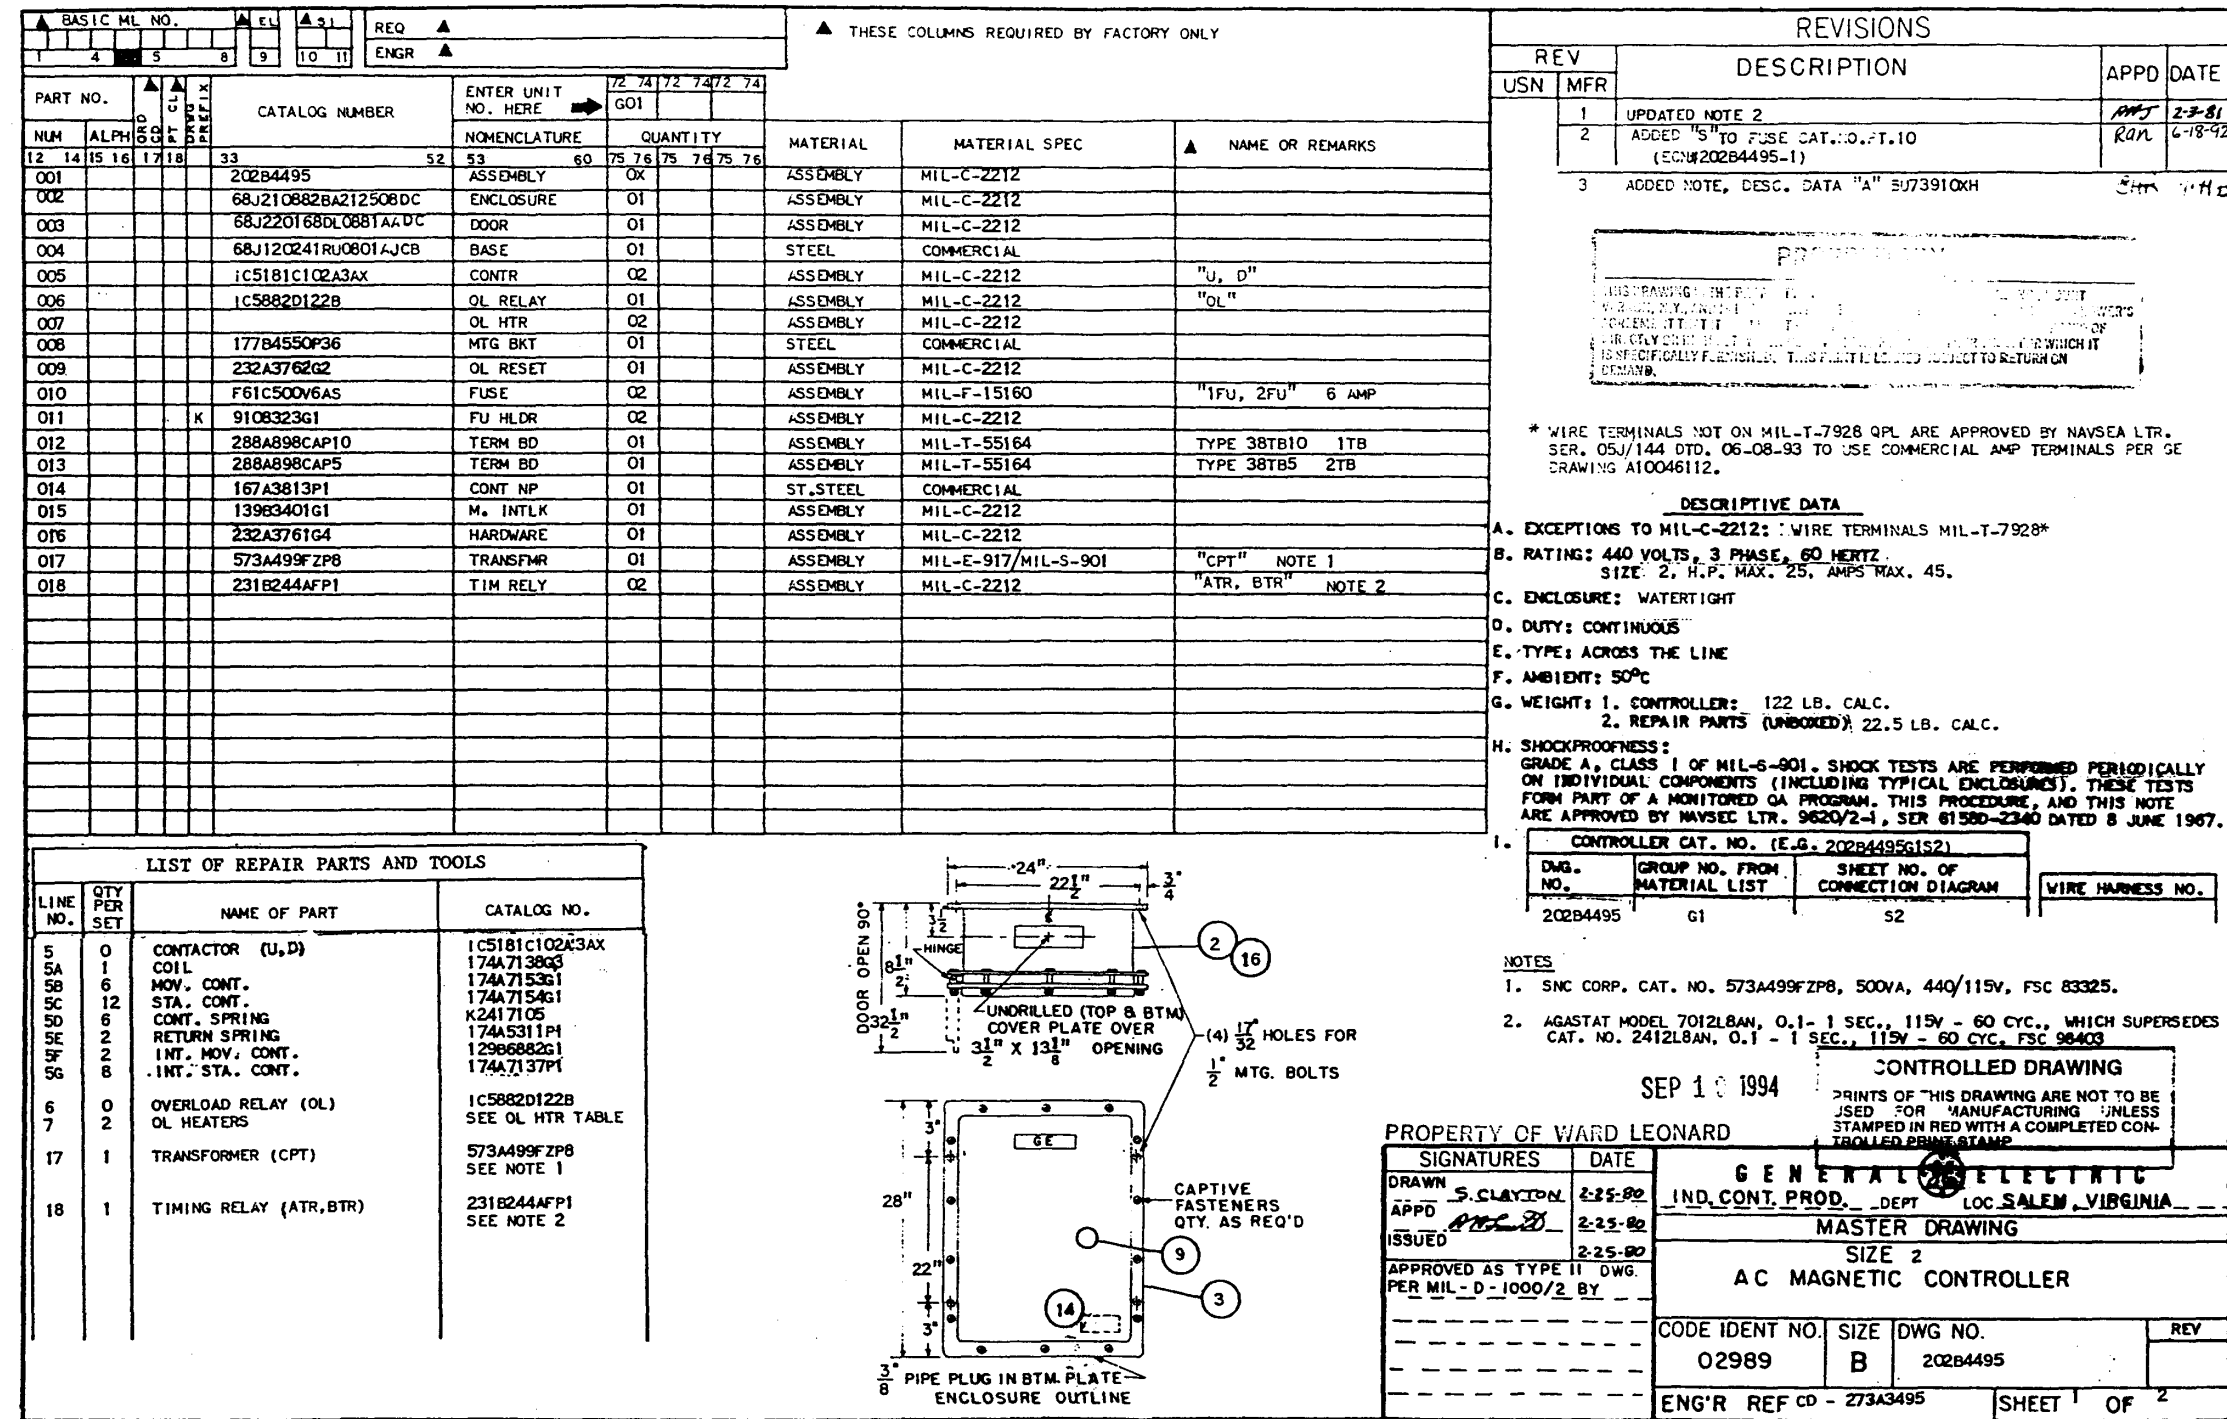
Motor Controller, Dwg. No. 202B4495 (Sheet 1 of 2)
